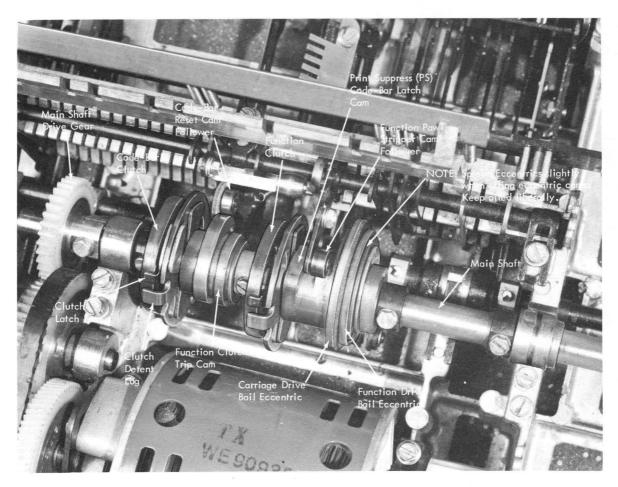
Main Shaft (Clutch Trip Shaft Removed)
